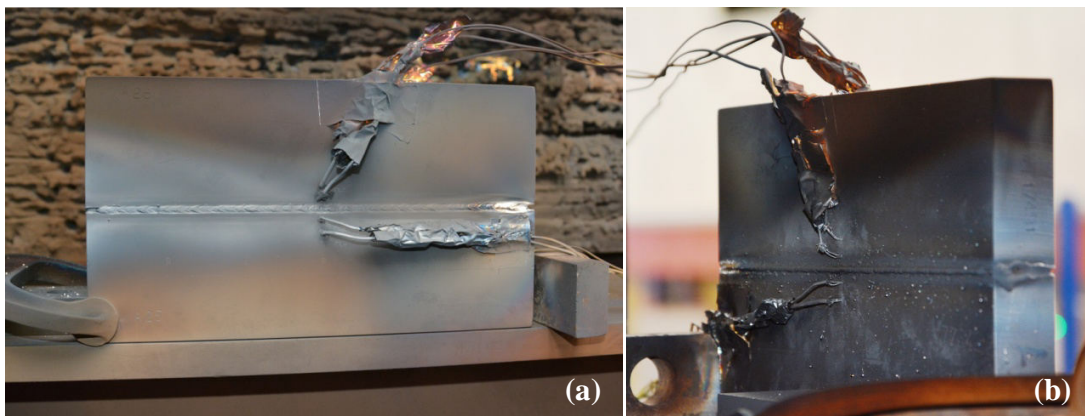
RPEB 30-mm thick single-pass weld specimen instrumented with thermocouples, after welding: (a) front surface; and (b) back surface.
